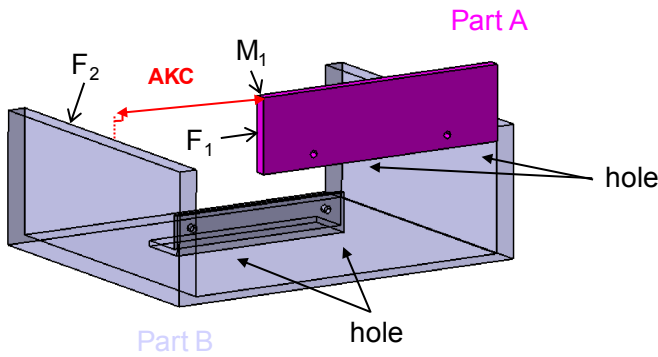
Case study 2. Two parts forming the assembly in exploded view along with the defined AKC
